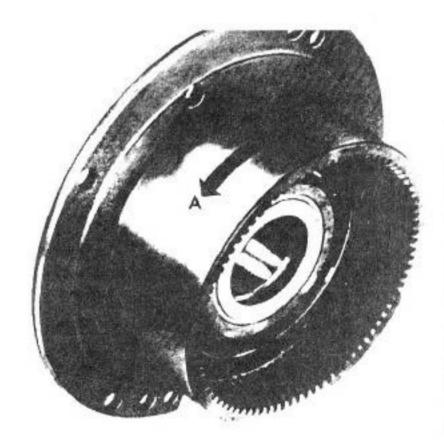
One-way clutch. When installed on the bearing flange, the clutch turns in direction A but holds in direction B.
